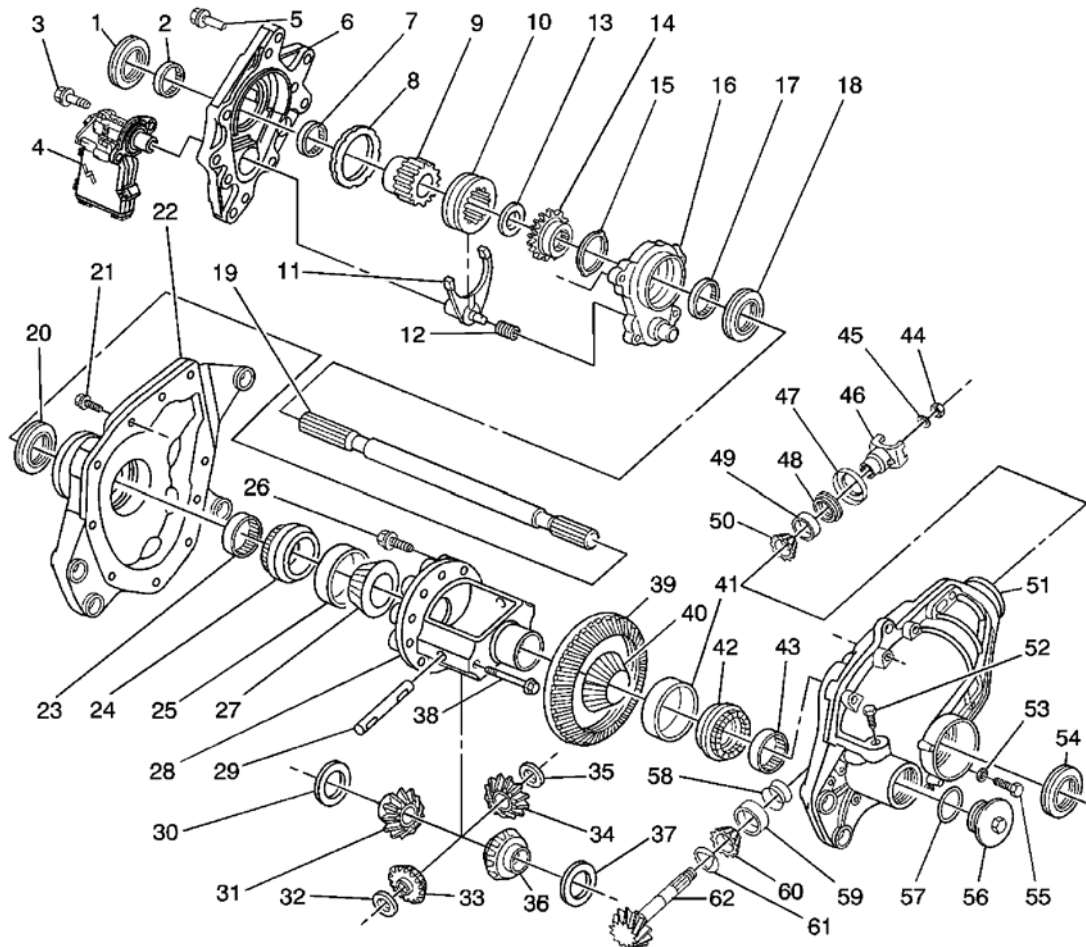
Front Drive Axle Components (7.25 in Axle) (S4WD)
